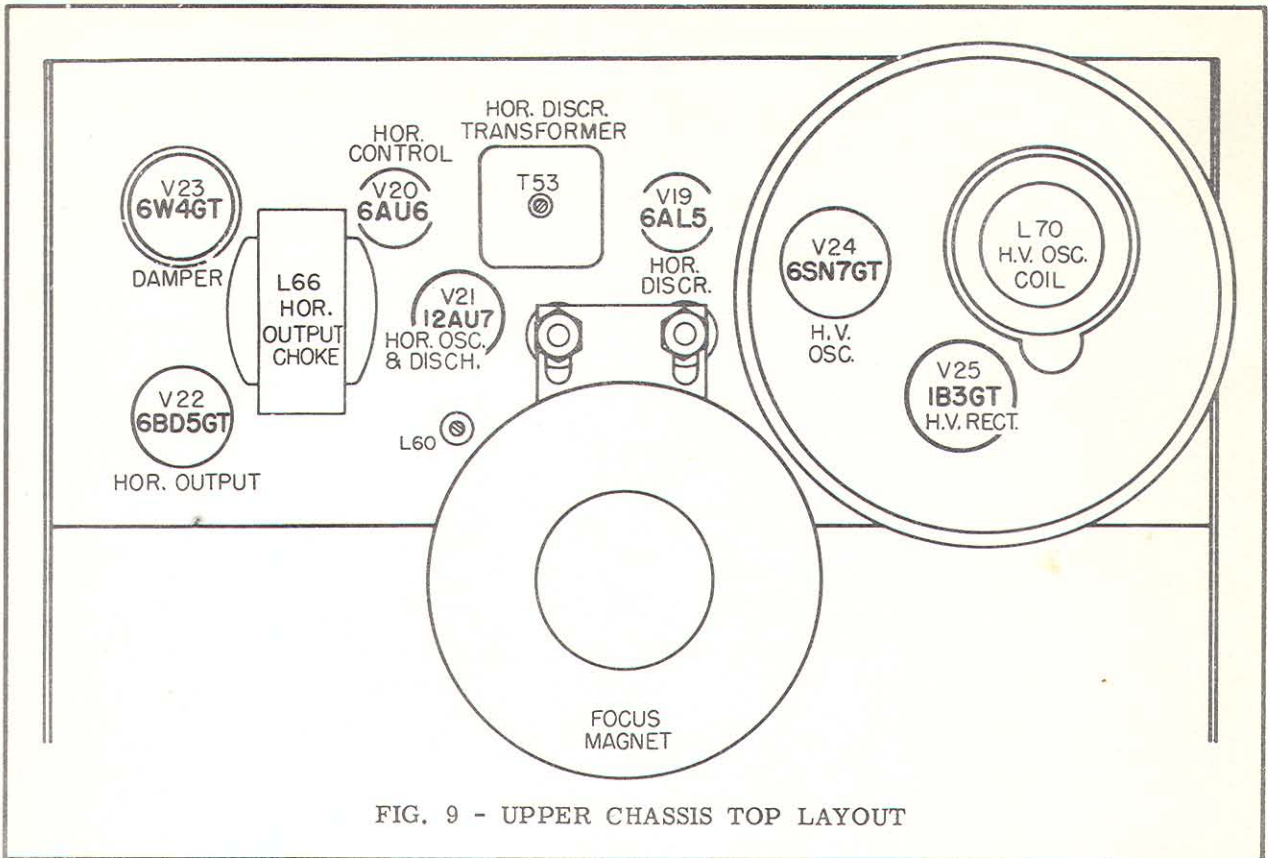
UPPER CHASSIS TOP LAYOUT
